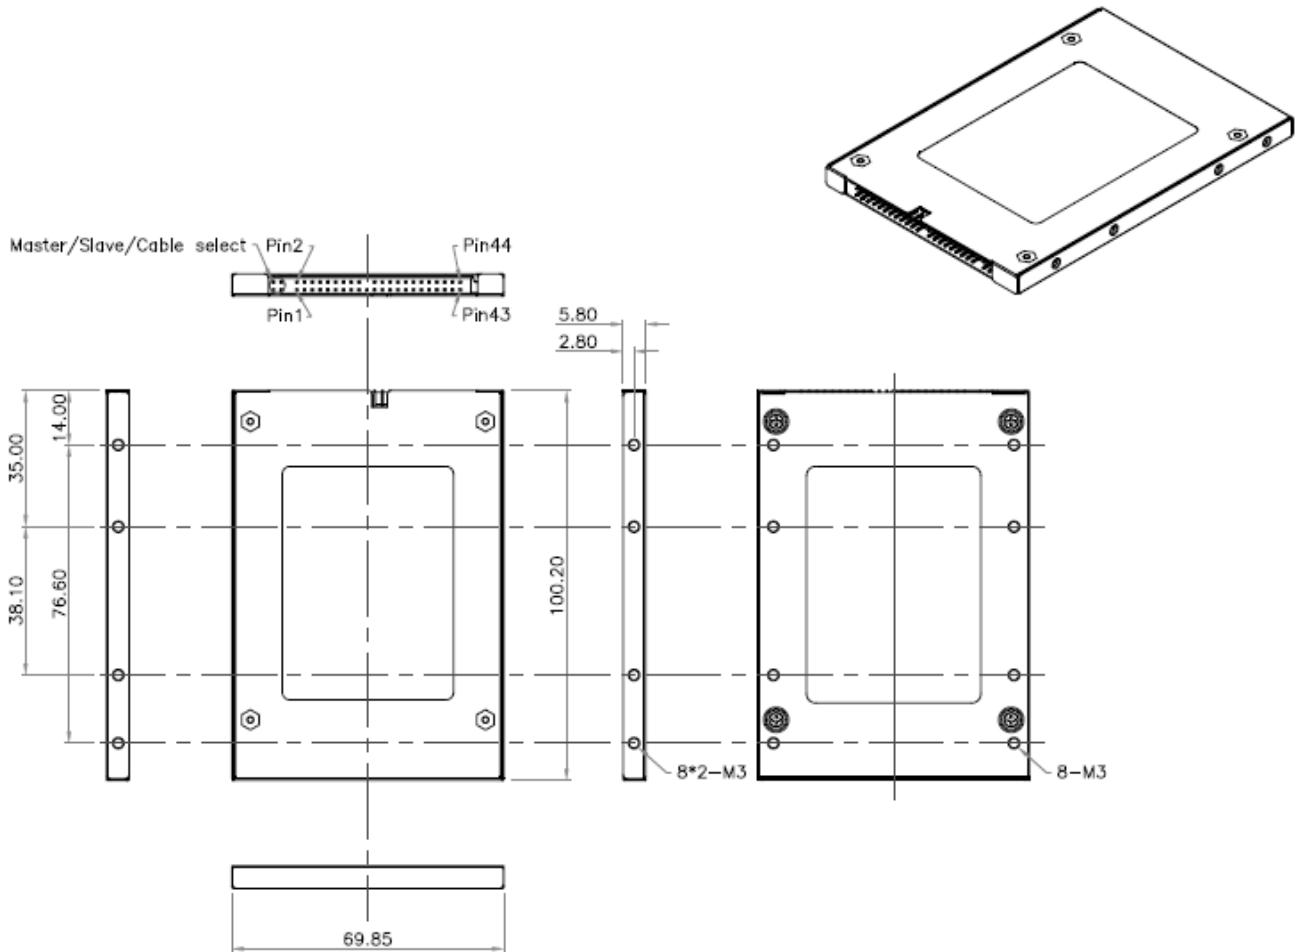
Mechanical Dimensions of 2.5" Lynx IDE SSD (H = 5.8mm)
